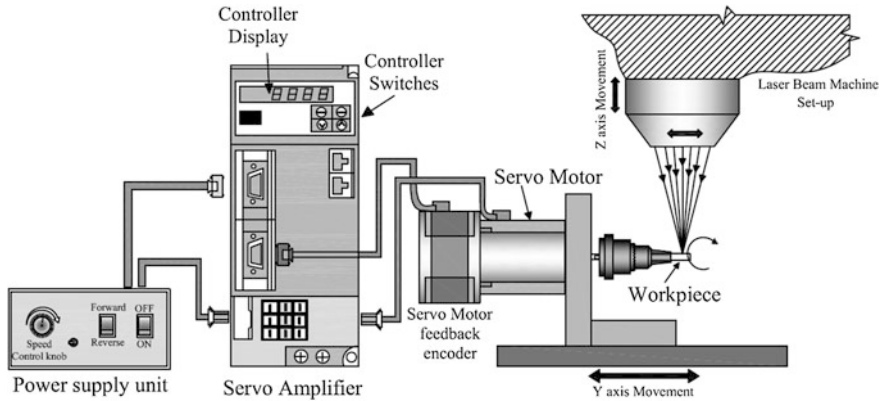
Schematic representation of workpiece holding and rotating system (Kibria et al. 2012)
